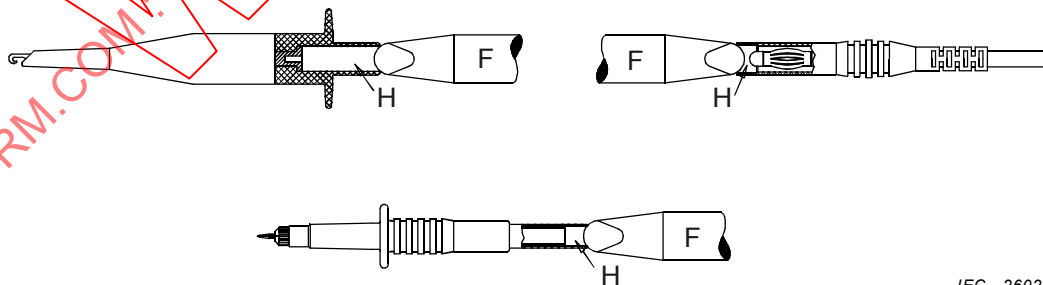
Fully mated PROBE ASSEMBLY (see 6.2 and 6.4.1a))
